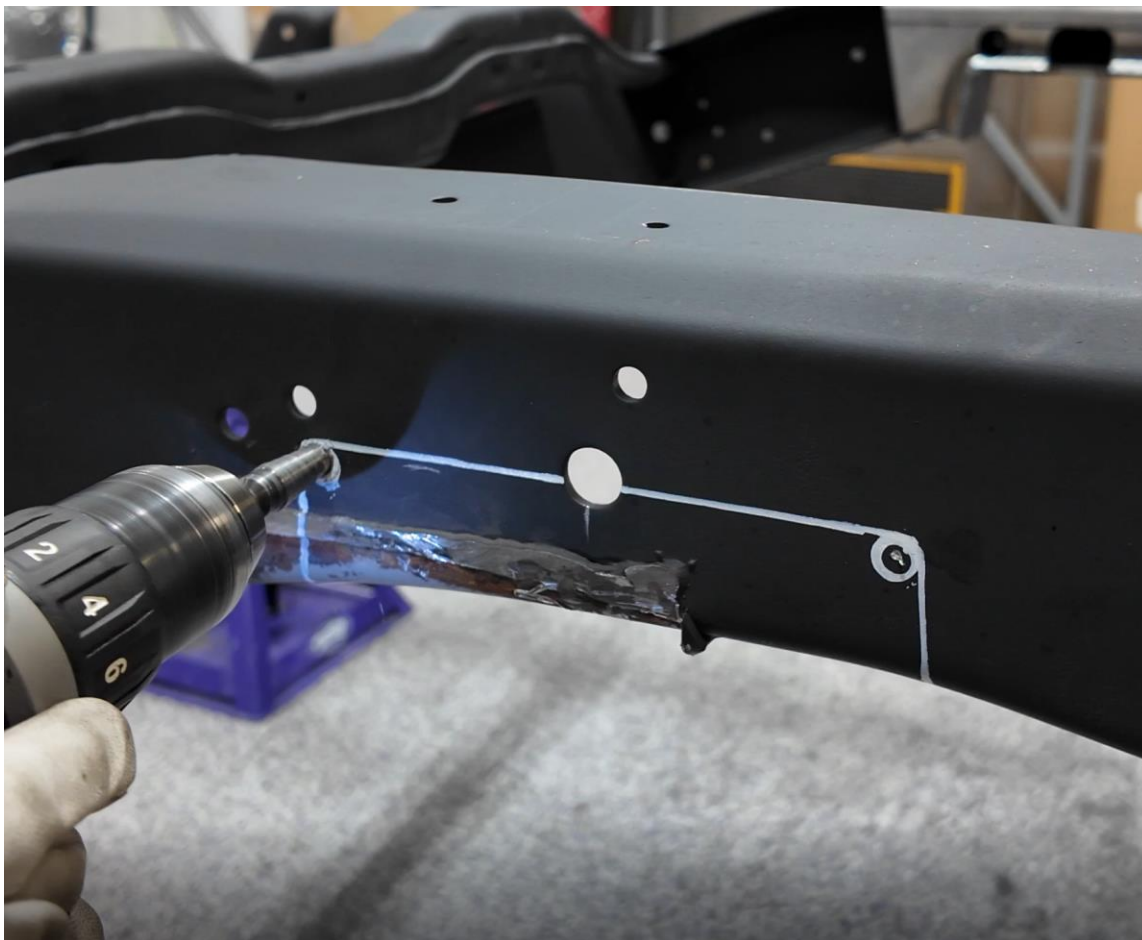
Trace Frame Notch Cutout and Drill Corner Radius
